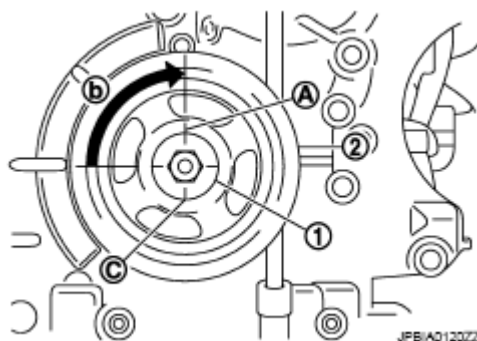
Identifying Crankshaft Pulley Bolt Tightening Angle
